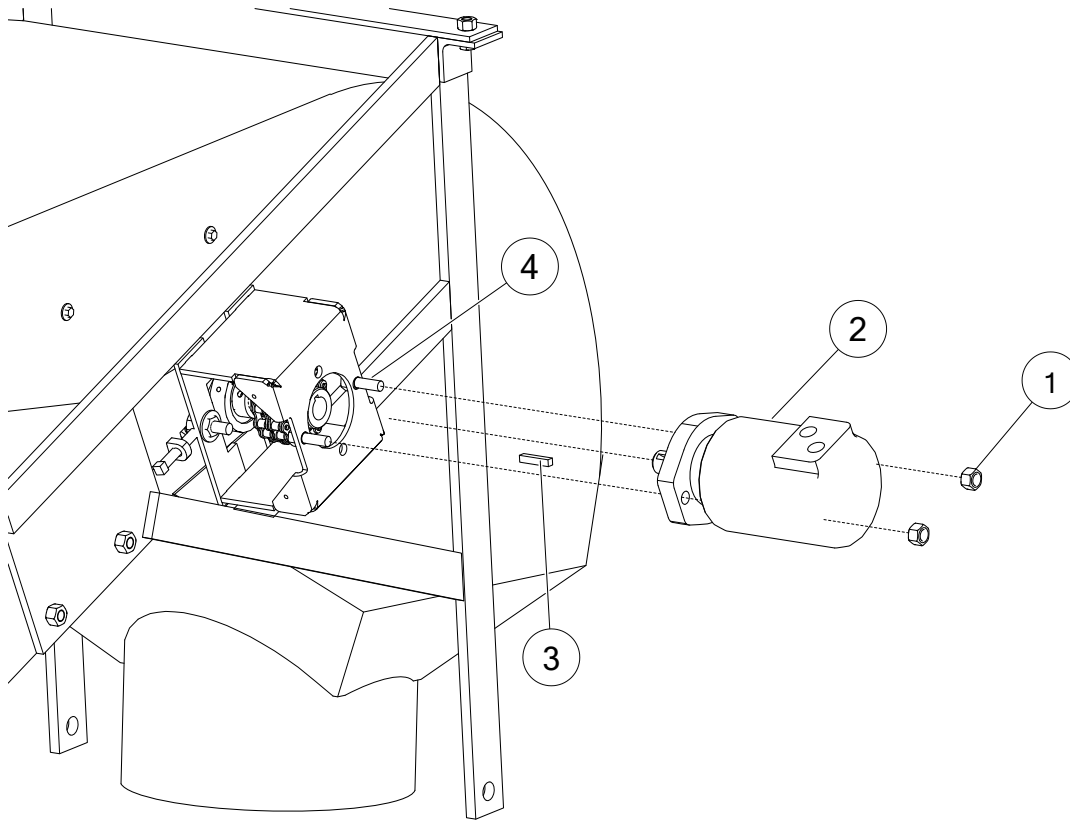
Installing the Motor Mount and Sprocket/Chain AssemblyInstall the Hydraulic Motor
